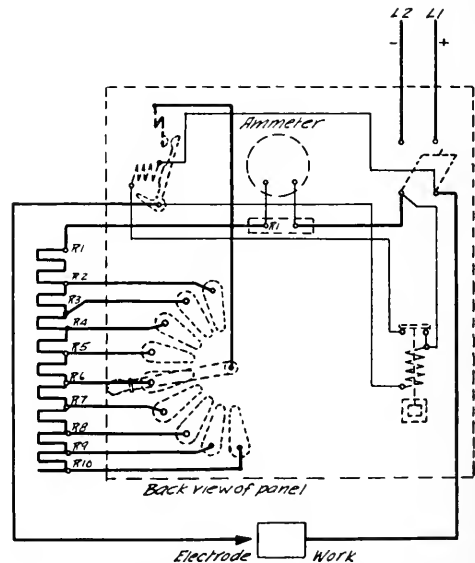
Connection Diagram of the Auxiliary Arc Welding Panel shown in Fig. 22
